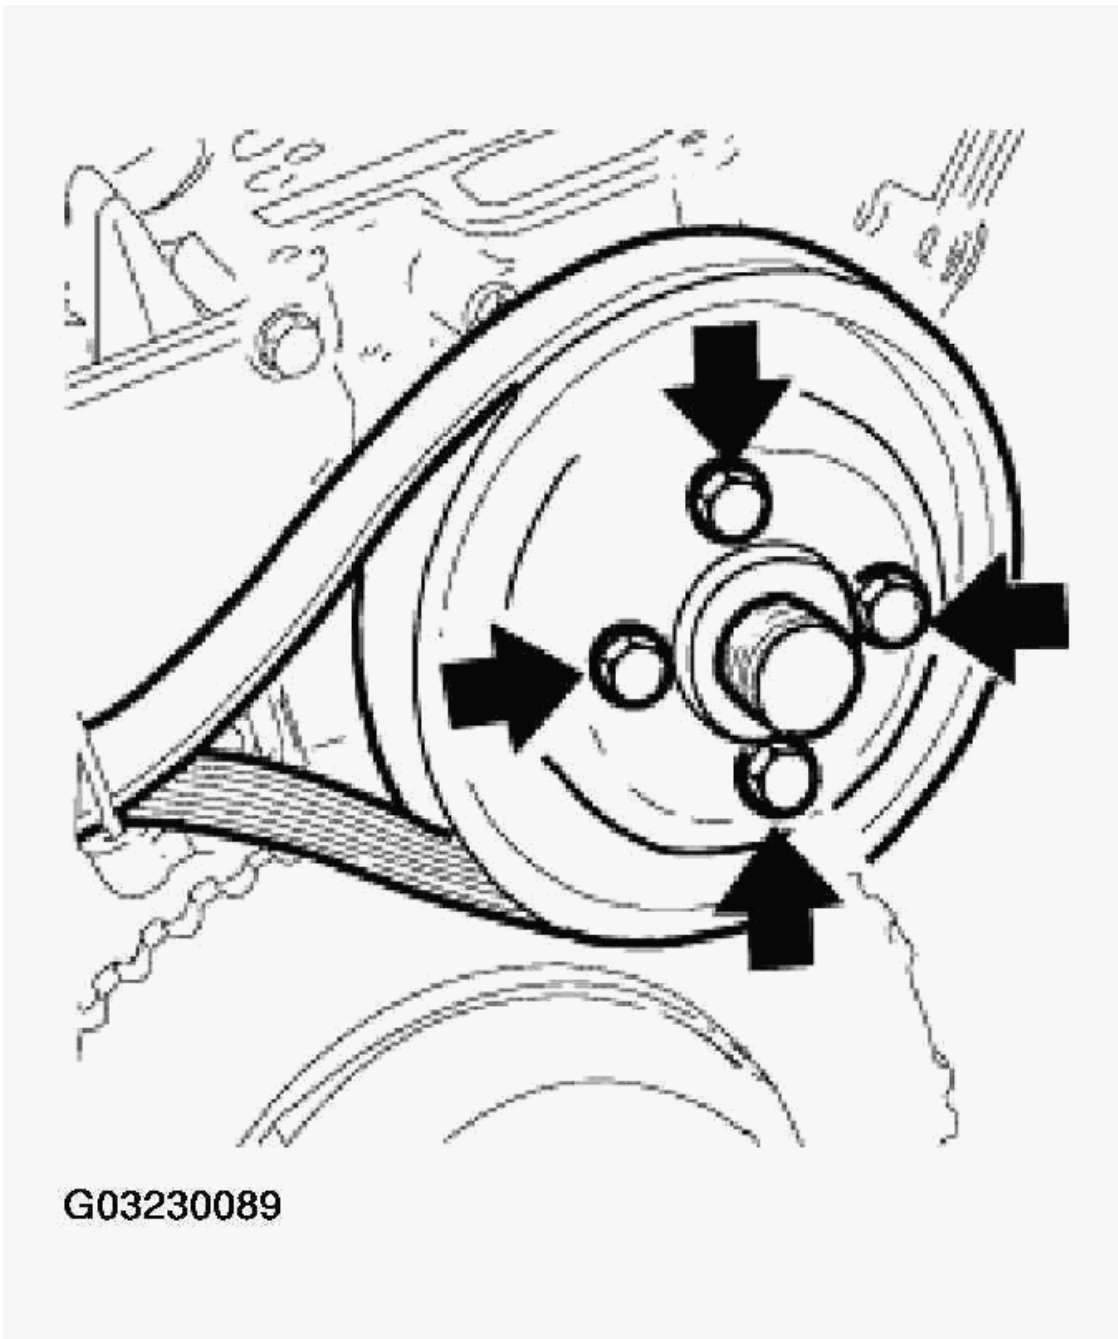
Locating Retaining Screws For Water Pump Pulley
